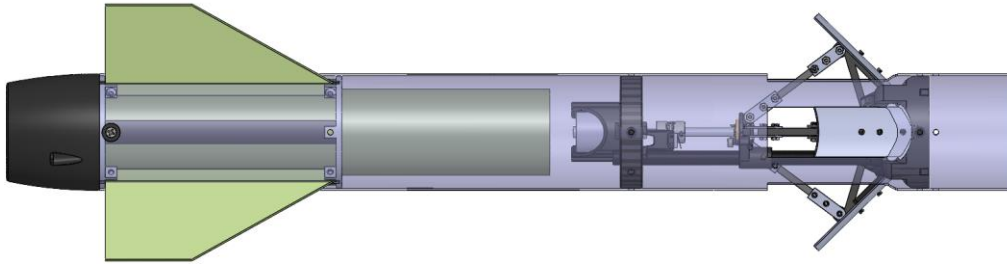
Booster section without the drogue parachute bay/airbrakes can.
